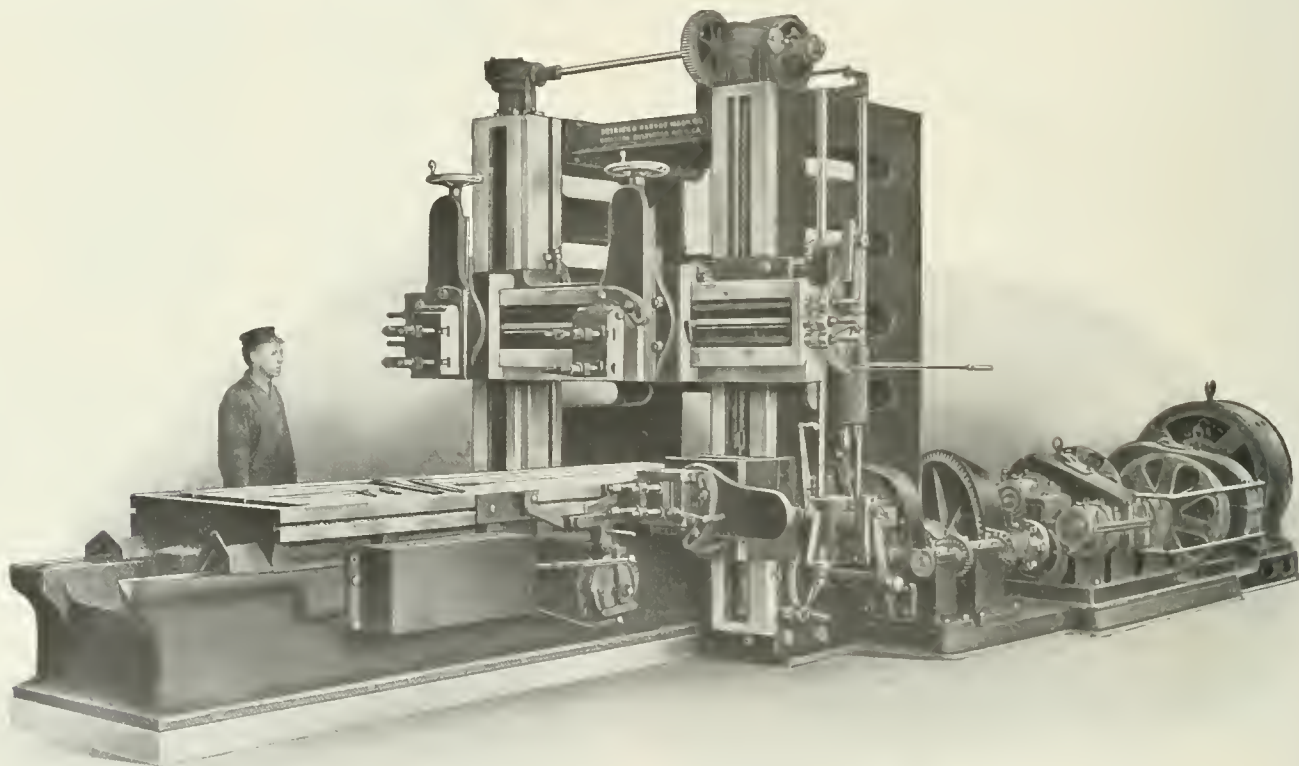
Detrick & Harvey Heavy-duty Planer with Induction Clutch Drive
